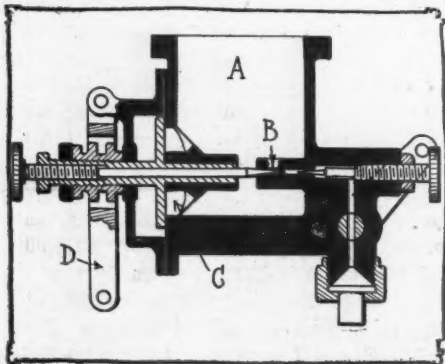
HEZINGER FLOATLESS CARBURETER WITH CONTROLLABLE AIR VALVE
